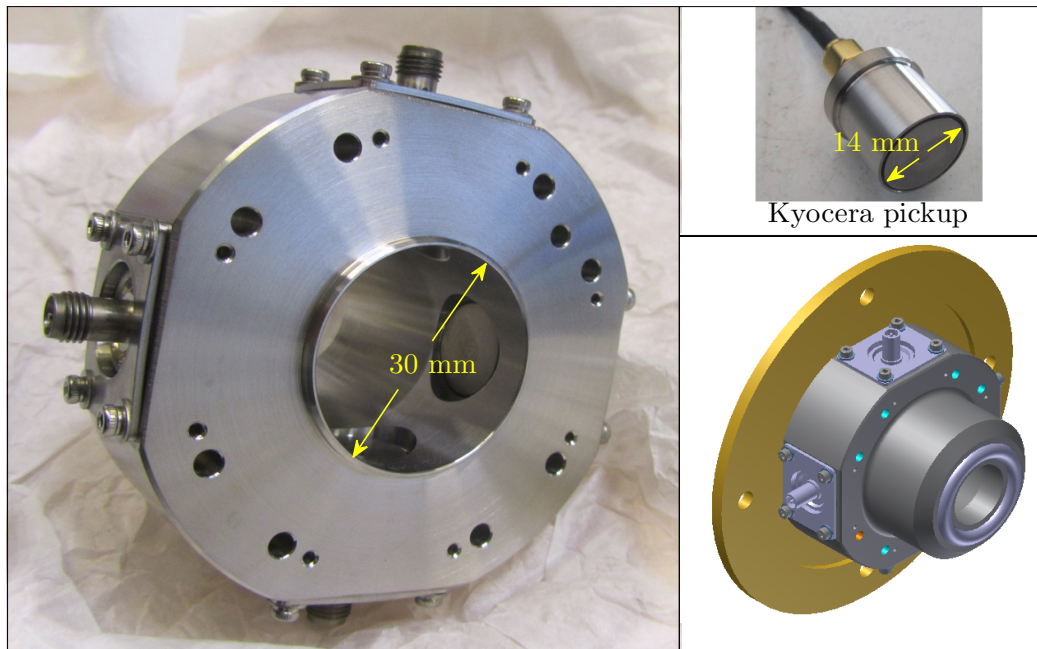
The first BPM prototype with four Kyocera buttons (left). The Kyocera pickup and CAD drawing of the BPM with the flange (right)
